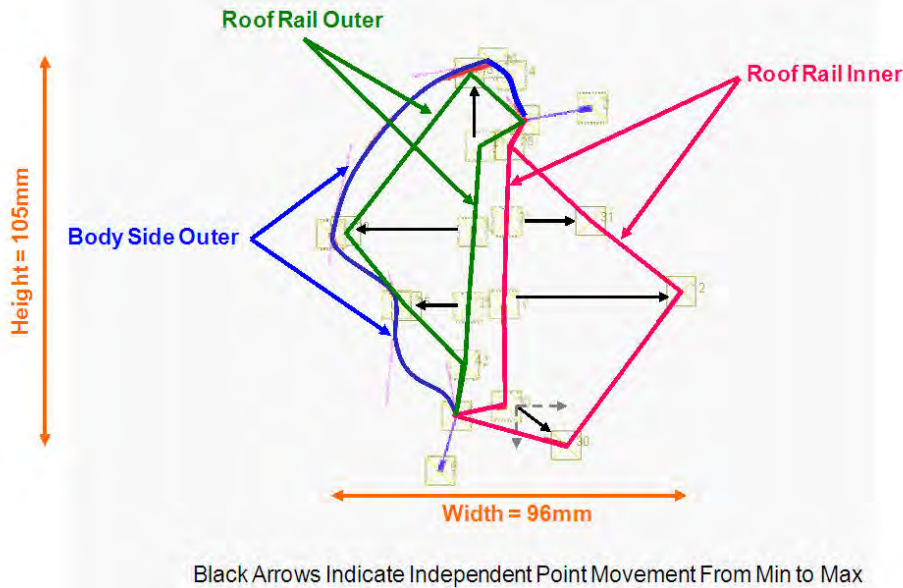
Stamped side roof rail concept - cross-sectional parameterization
